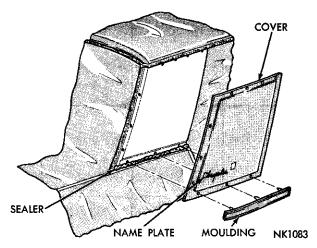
Sealing the Roof Extension Panel (Chrysler)
